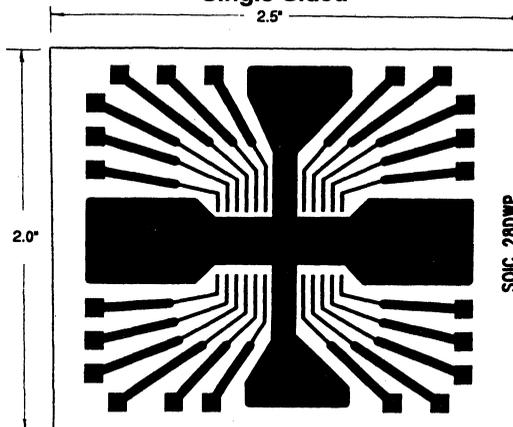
Test PC Board Layouts (SOIC 28DWP)
